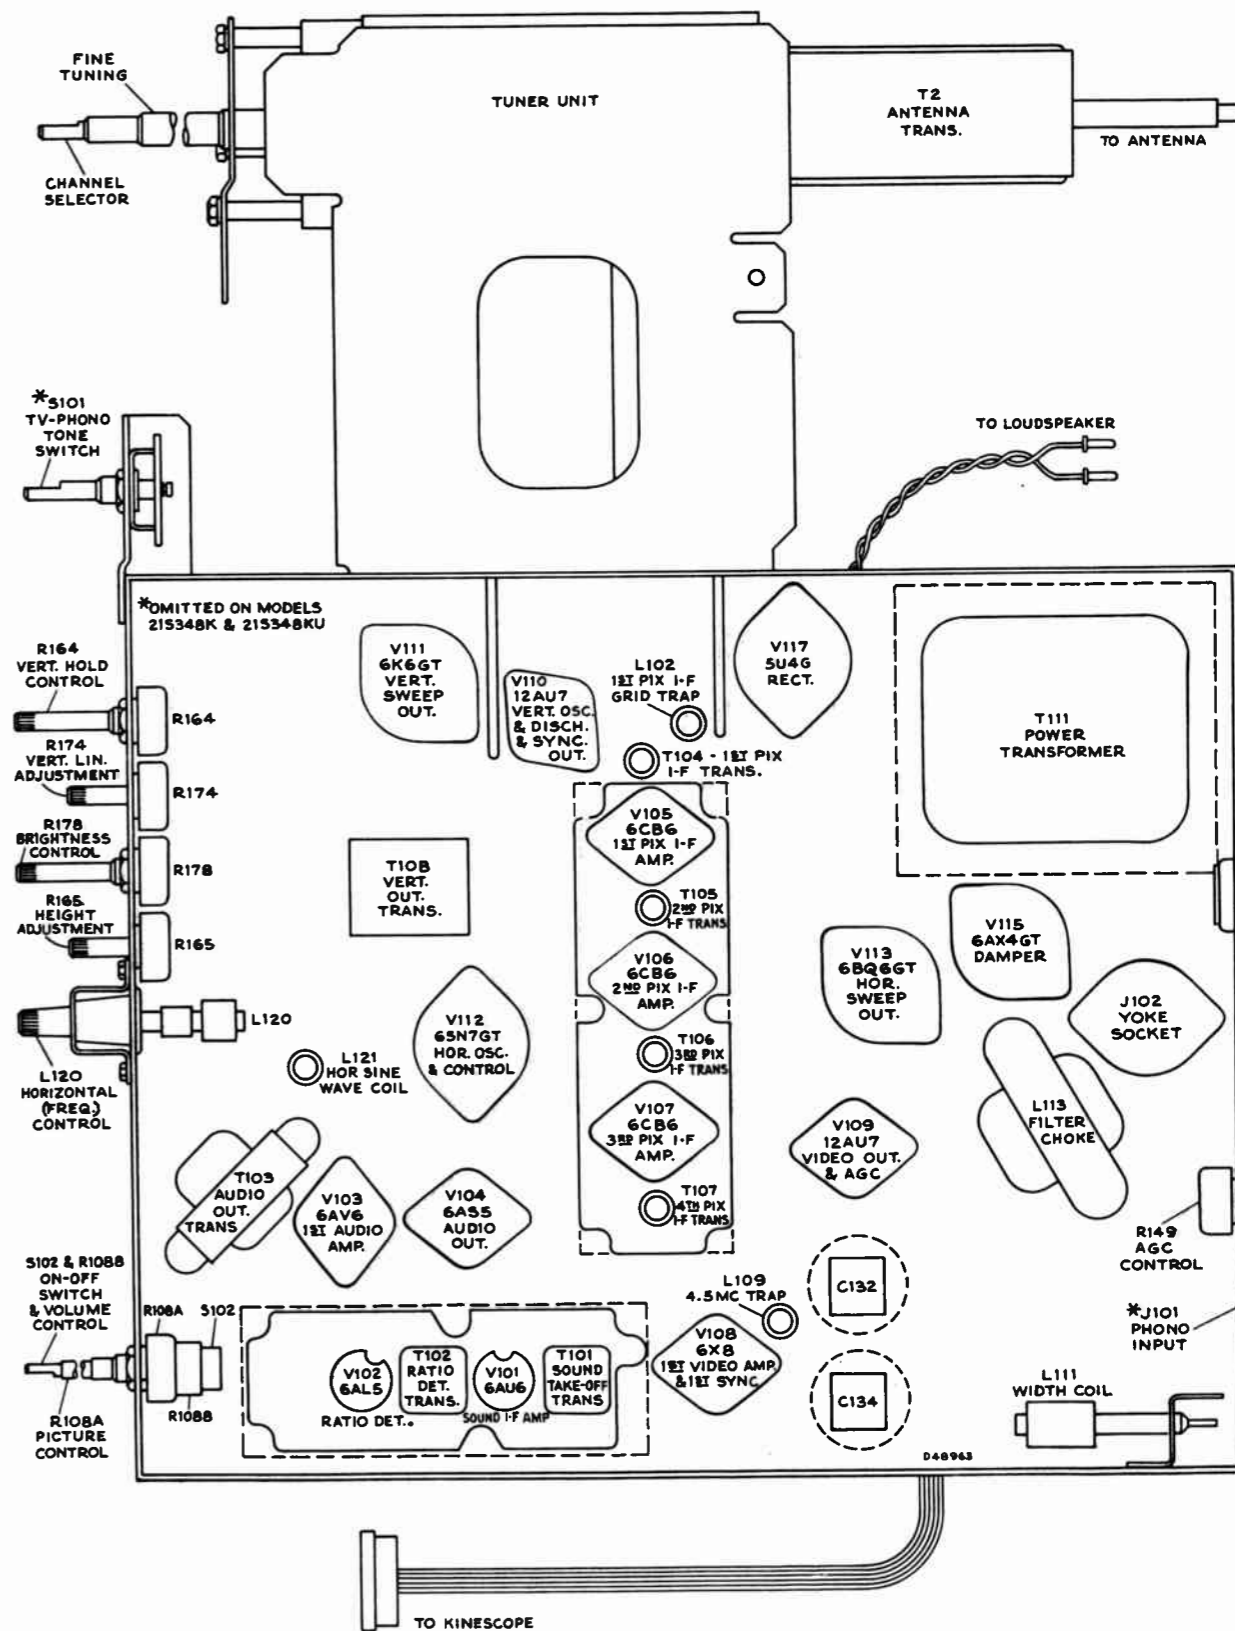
Chassis Bottom View (shown with KRK22D Tuner)
